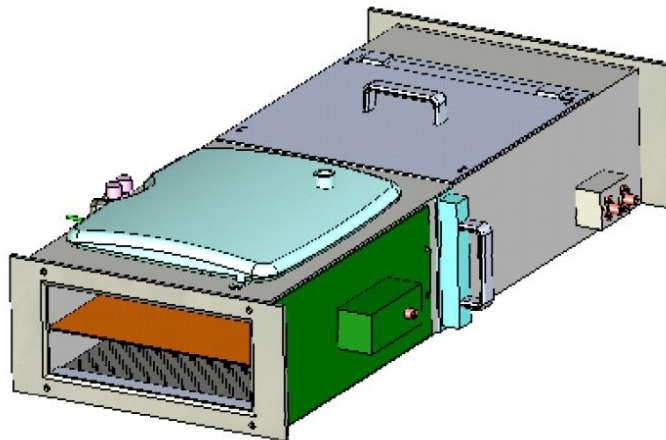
Solid Works drawing of SELEX II Breadboard prototype
